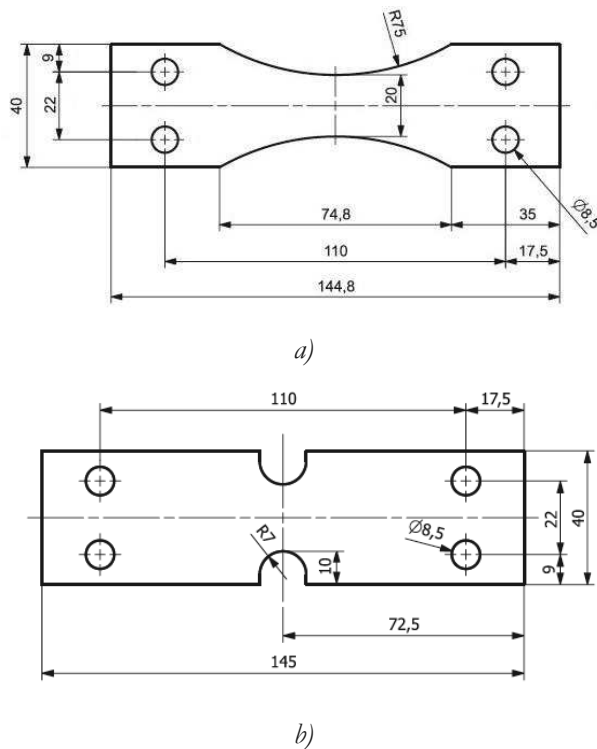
Types of specimen used to creating of material s-n curves. (a) smooth (normalized) specimen for bending fatigue test, (b) specimen with u-shape notch for bending fatigue test.
